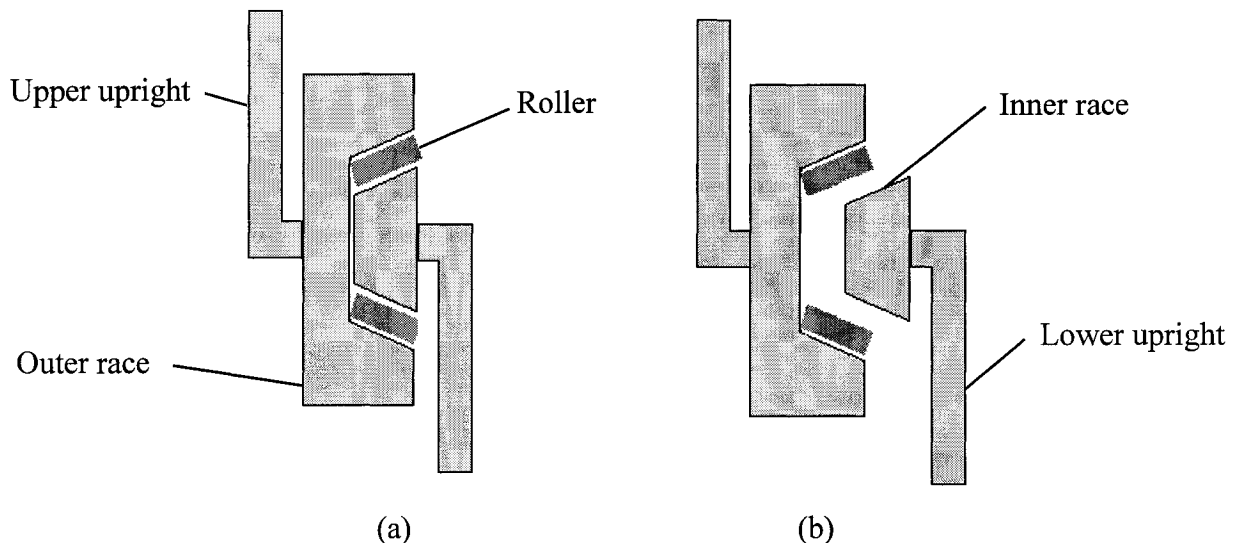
A drawing of the conical roller-clutch cross-section showing its function. (a) When the conical inner race is brought into contact with the rollers, the joint functions as a conventional roller-clutch; (b) a pushrod-driven cam pushes the conical inner race out of contact with the rollers to allow free knee rotation in both directions.
